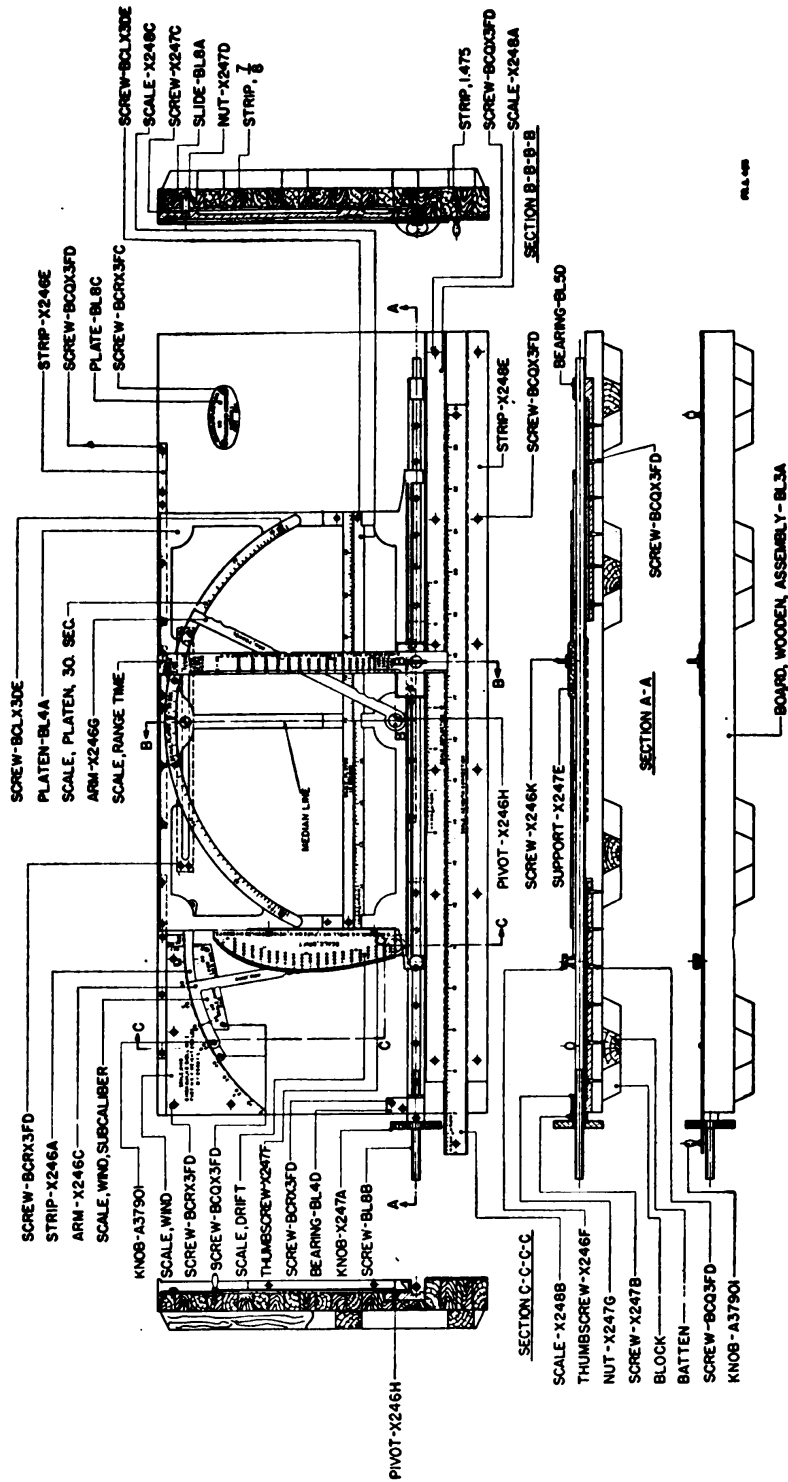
Gun deflection board M1905M1—assembly and sectioned views.
